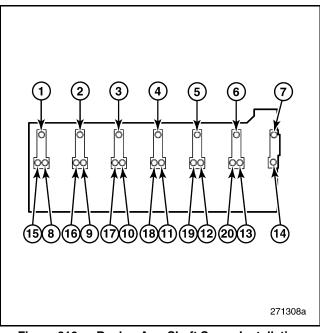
Rocker Arm Shaft Screw Installation Sequence
